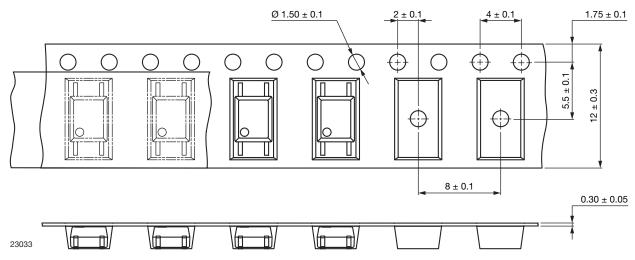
Tape and Reel Packaging (3000 pieces on reel)
